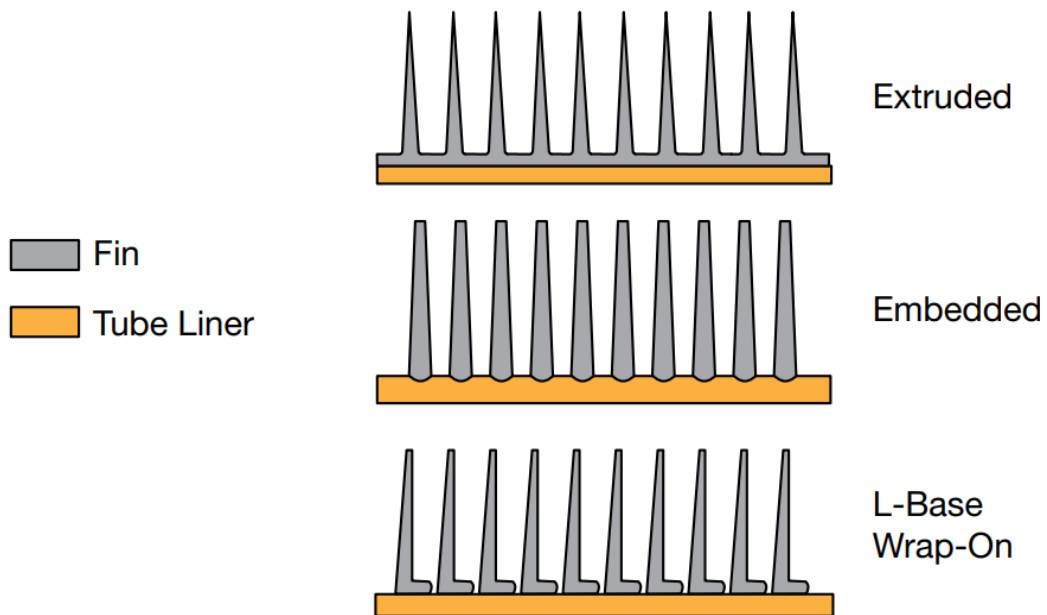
The three basic types of aluminum fins are extruded, embedded, and wrap-on.
